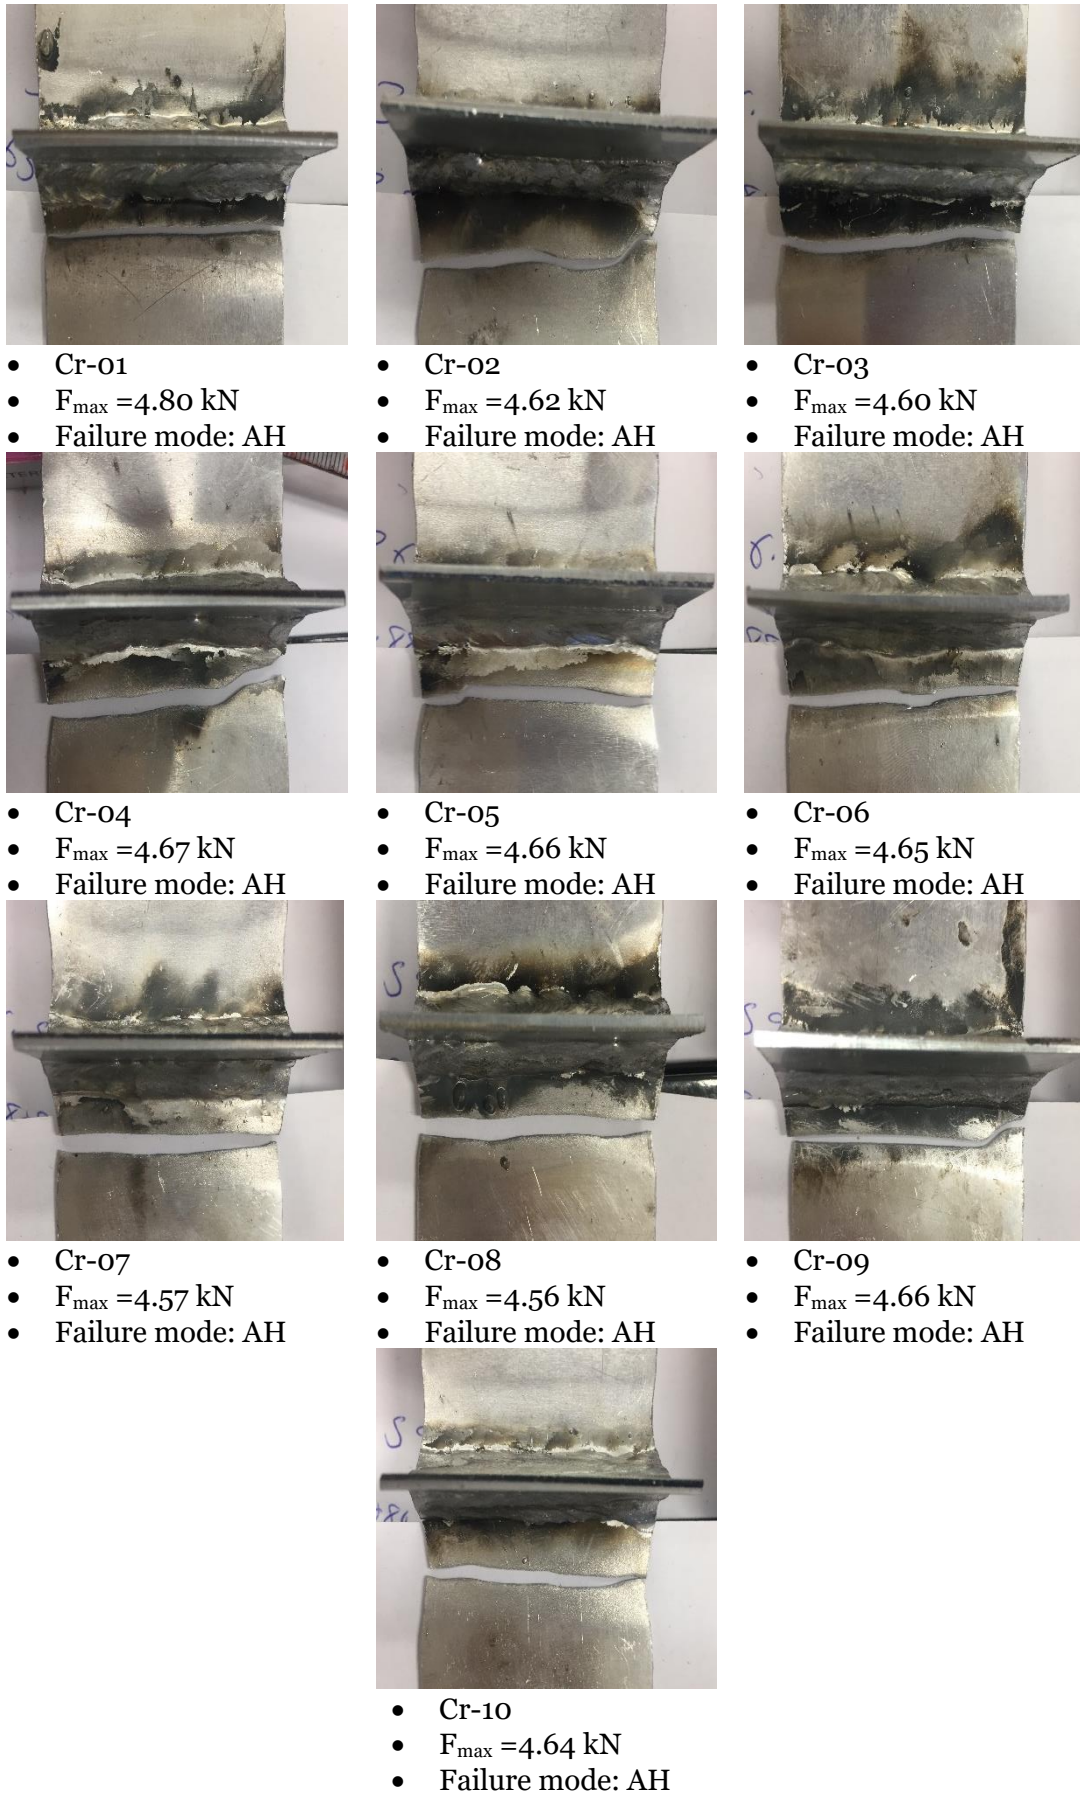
Tensile static failure of cruciform-welded joints (long-term).
